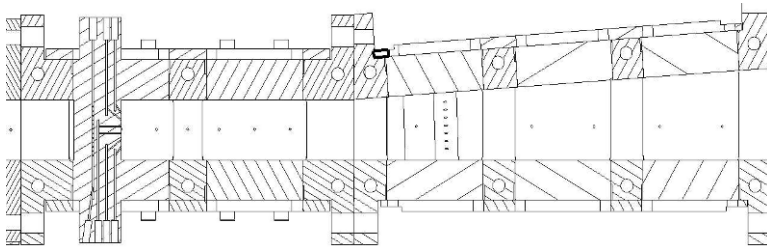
Cut of the combustion chamber with strut injector and cavity.
